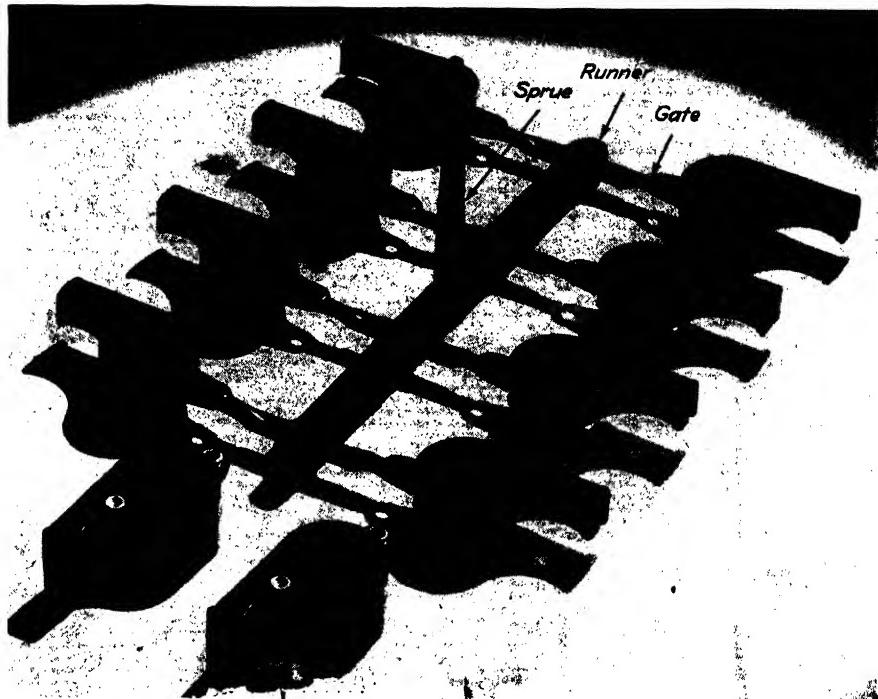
Multiple cavity mold showing molded pieces, runners, and gates.
